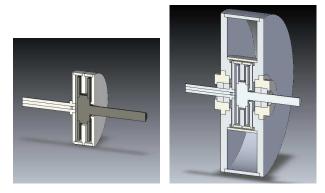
Clutch Design: Torque Transfer Drum with Parallel Plates and Cross Section of Clutch Assembly Encasing Drum
